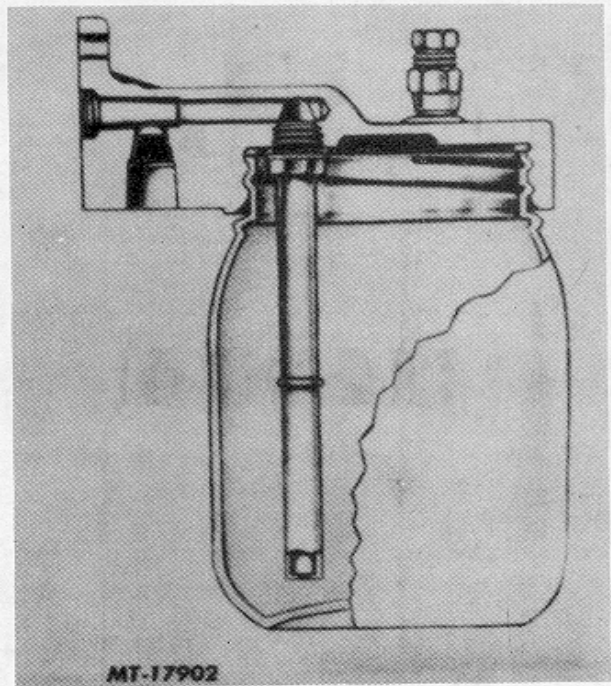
Cutaway View of AE-1 Alcohol Evaporator
